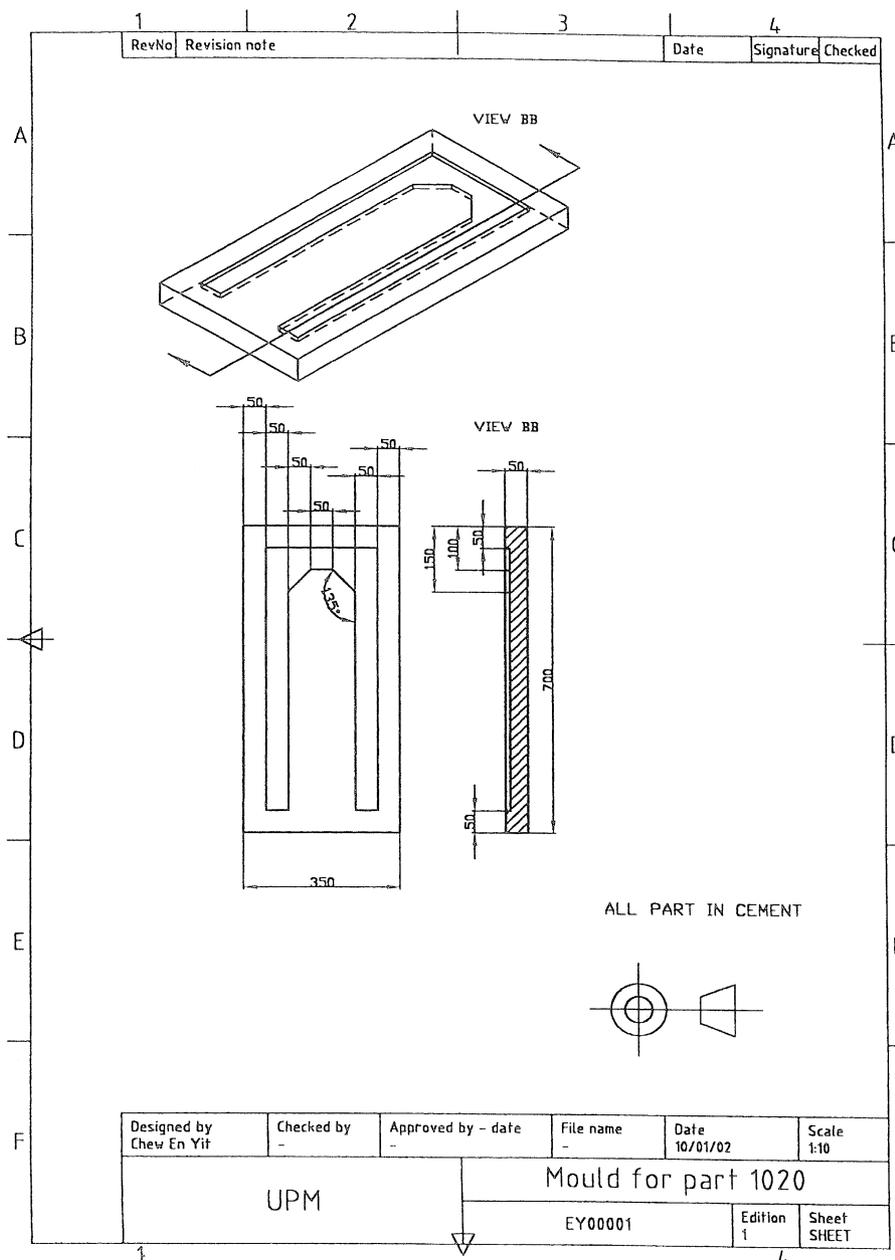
Detail drawing of the mould used during fabrication of telephone stand.
